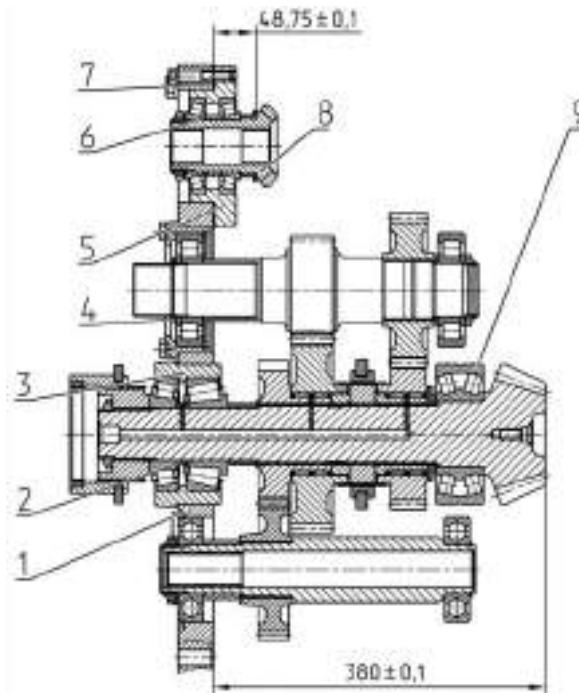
Differential and plate ready-assembled with drive gear of master pair in rear axle body
